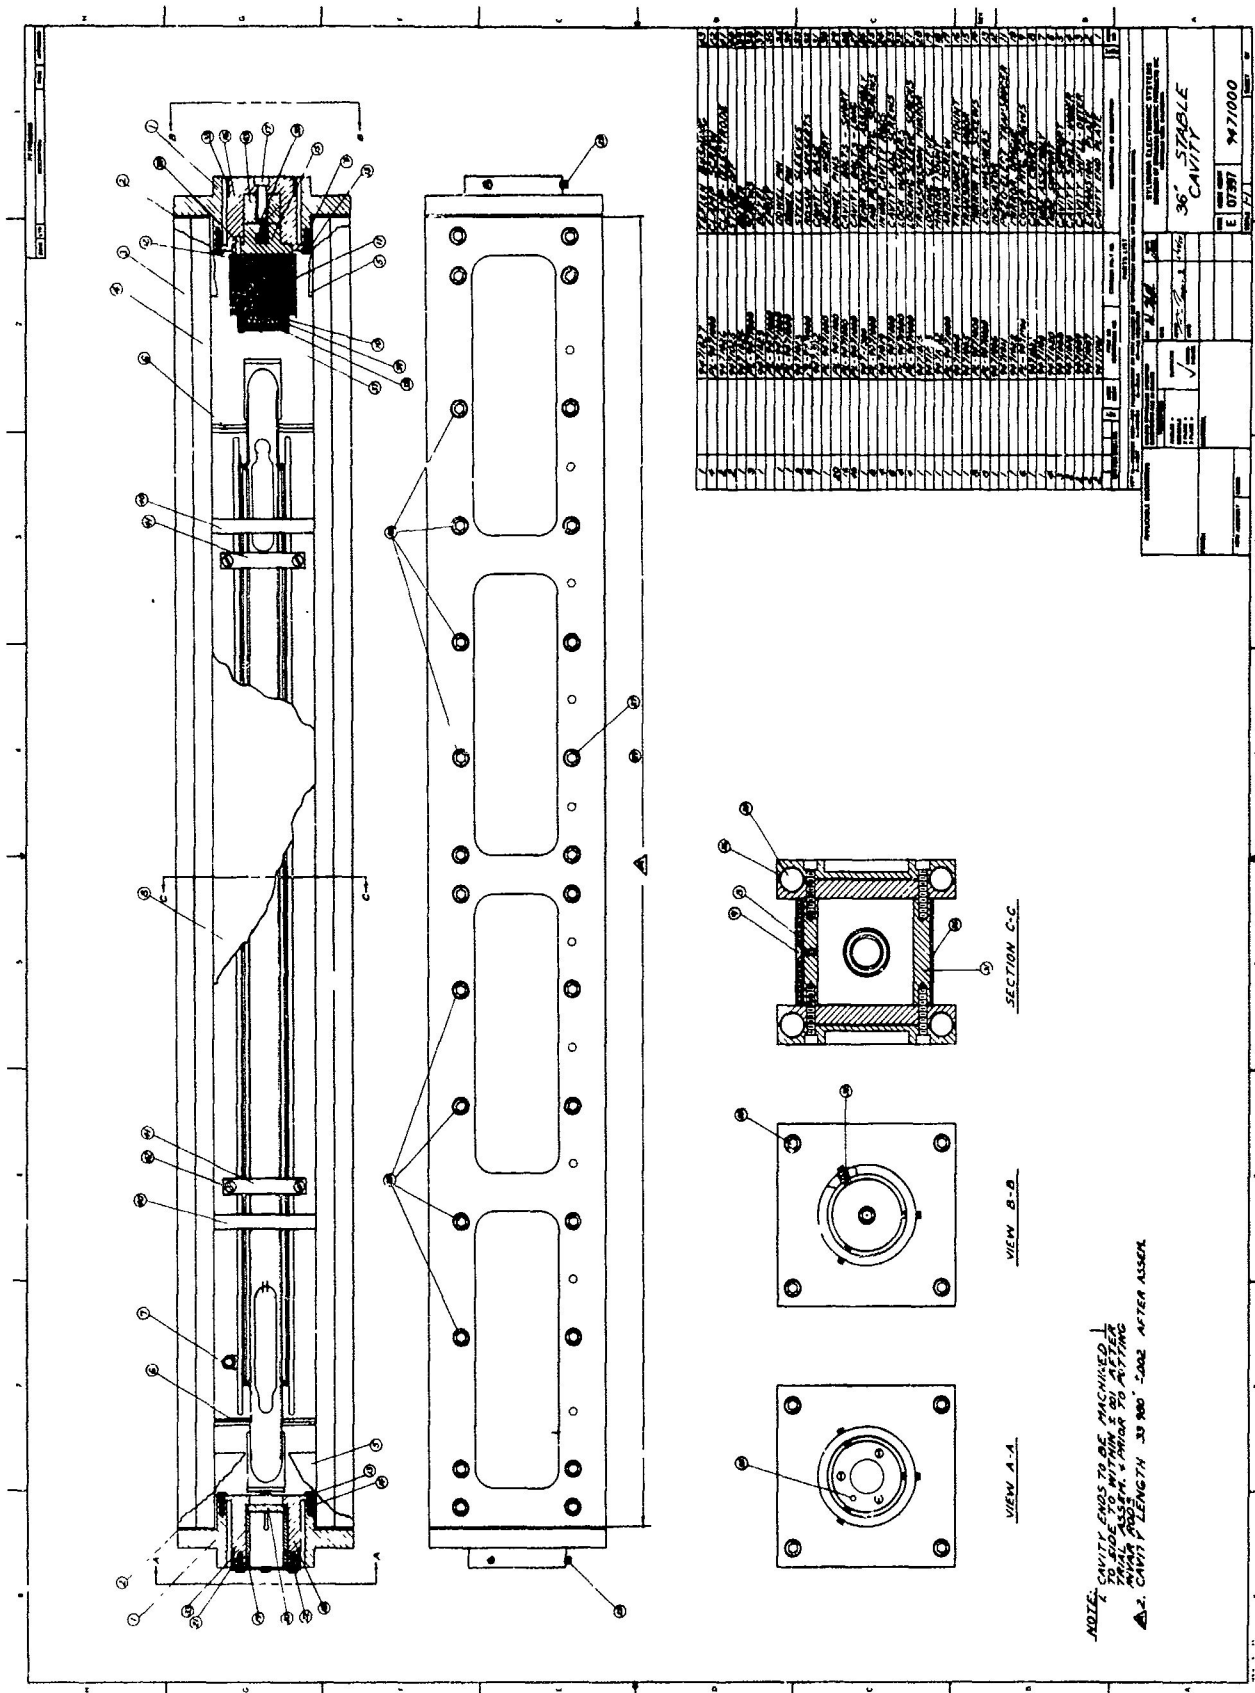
, Assembly Drawing of Stabilized CO₂ Laser Cavity
